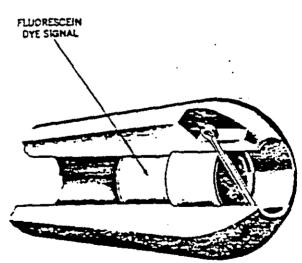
3-16 Miniature Practice Bomb AN-Mk 23 Mod 1, Cutaway View and Detail Showing Signal Mk 5 Mod 0 Installed.
